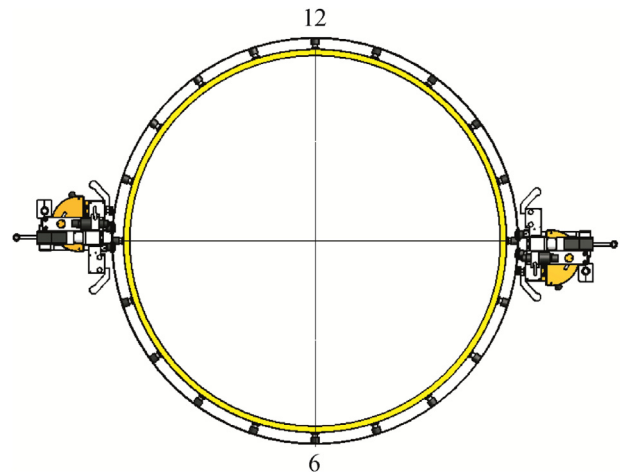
Working principles of an automatic welding by use of self-shielded flux cored wires.
